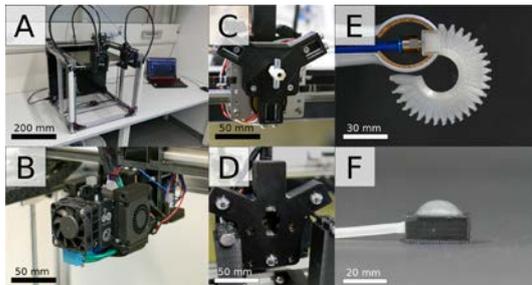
Novel multi-material 3D-printer with on demand tool changing. The entire setup consists of the printer frame and its axis system (A), and the newly developed filament printhead attached to the X-carriage (B). The carriage side provides the grooves of the Maxwell coupling with a T-shaped key in its centre (C), which is inserted into a lock on the back side of the printhead (D). The system is able to print pneumatic actuators like bending fingers (E) and multi-material chambers (F). © Plant Biomechanics Group Freiburg.
